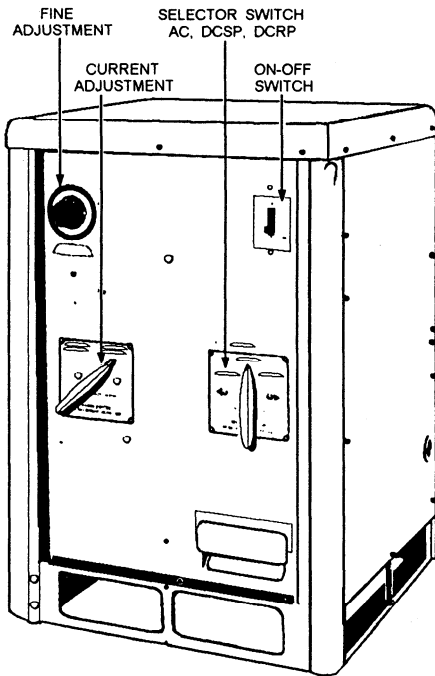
Combination ac, dc transformer-rectifier arc welder.
